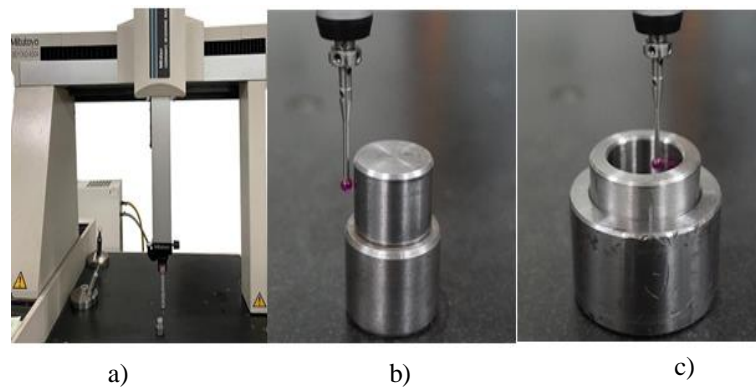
Specimen's diameter inspection on (a) Mitutoyo Beyond-A504 coordinate measuring machine for (b) shaft and (c) hub specimens
